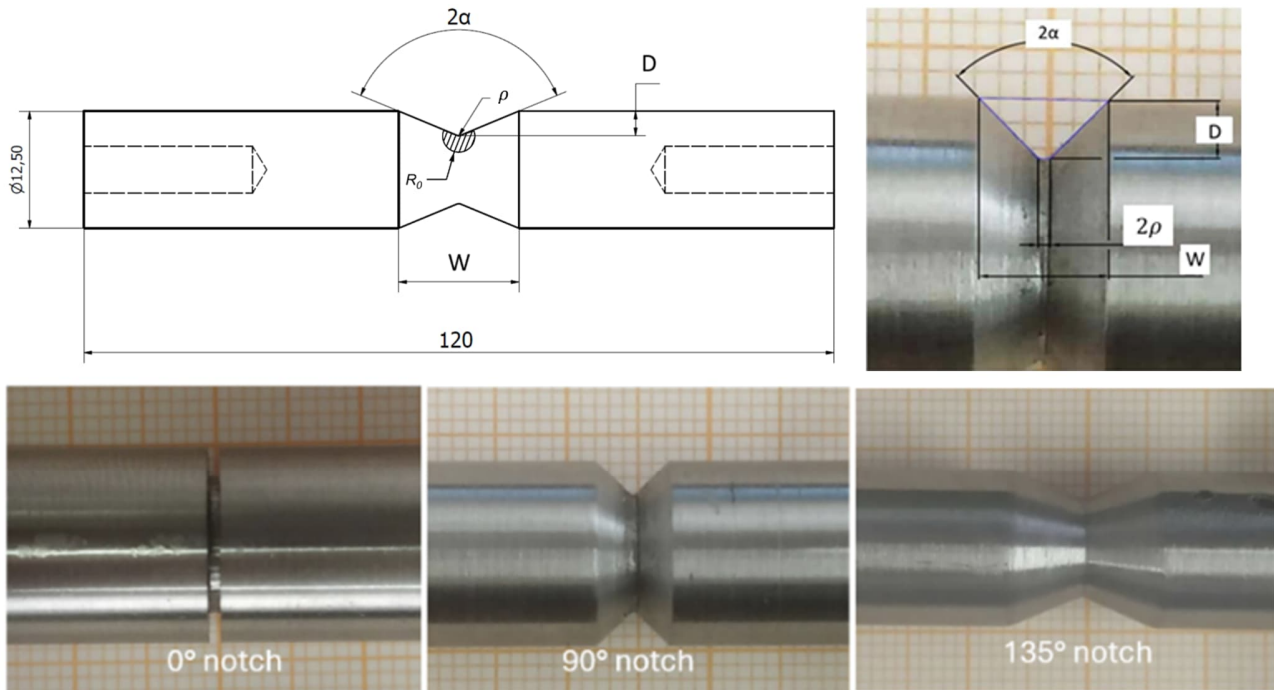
Main dimensions of specimen and definition of measured parameters of the notch
